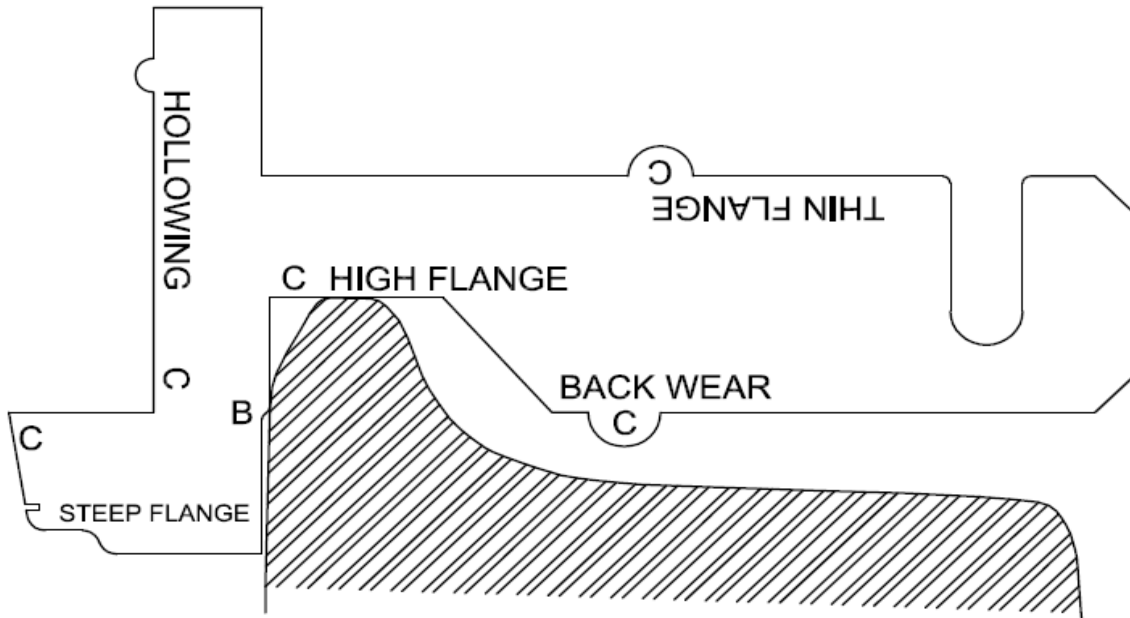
Wheel Condemn Gauge Drawing - Flange Height Indication
